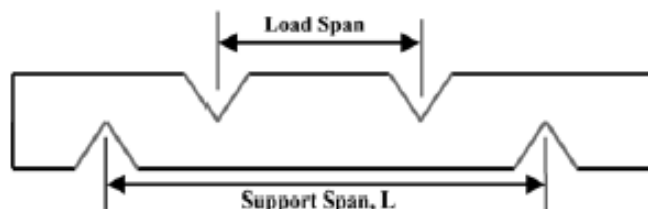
Fixture Used to Align Loading Noses and Supports
